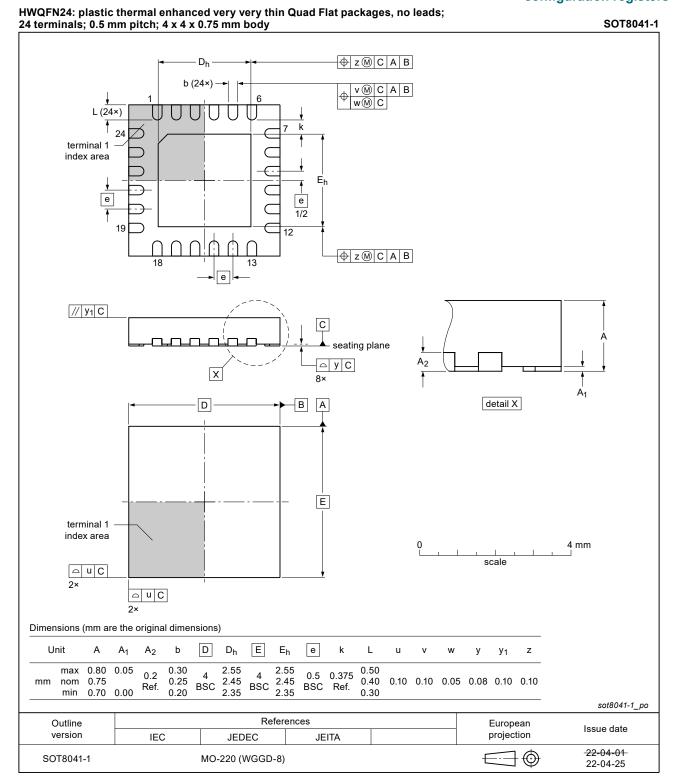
Package outline SOT8041-1 (HWQFN24)
